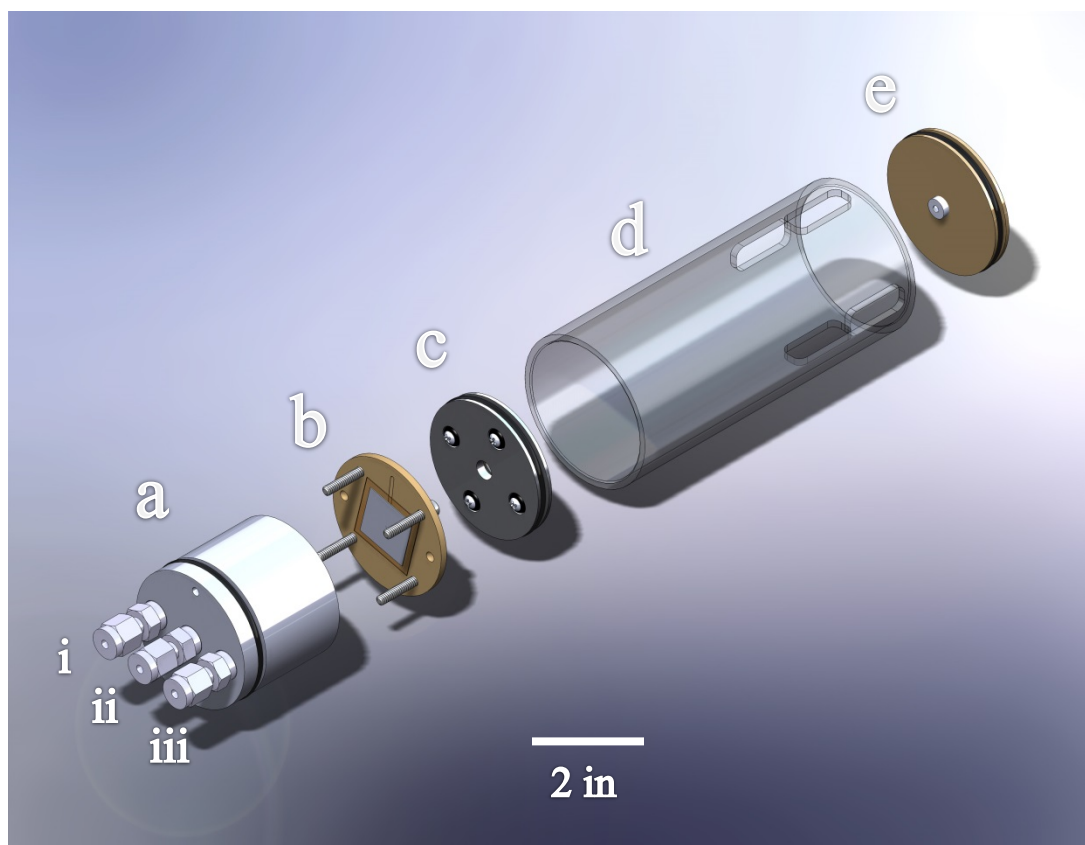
MHCD experimental assembly. (a) MHCD body, with (i) purge gas (ii) plasma supply gas, (iii) exhaust gas fittings, and (not pictured) electrical connections. (b) MHCD endcap, showing foil assembly and clamping screws. (c) LiF window with seals (d) Al housing (e) mass spectrometer inlet collar (with tip of MS capillary showing).
